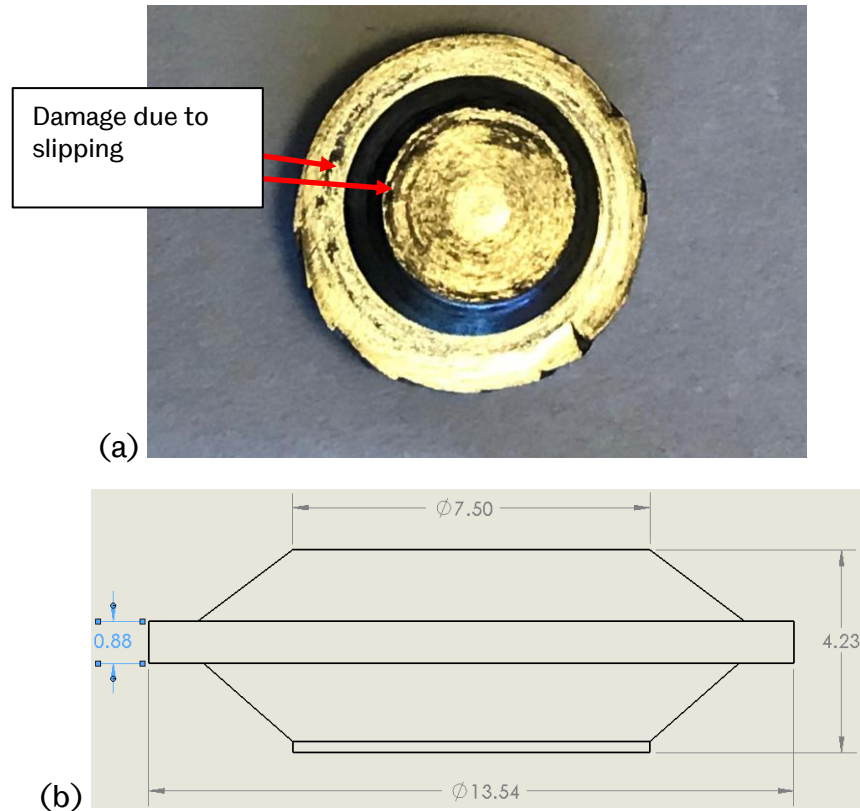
(a) Deformed R260 HPT sample; approximate dimensions of processed specimen
